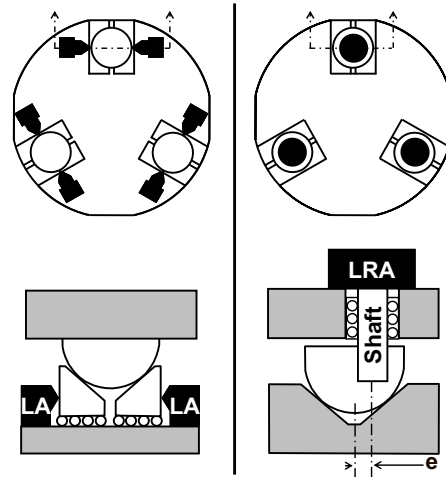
Moving groove (left) and eccentric ball (right) HPF designs. LA = linear actuator and LRA = linear-rotary actuator
